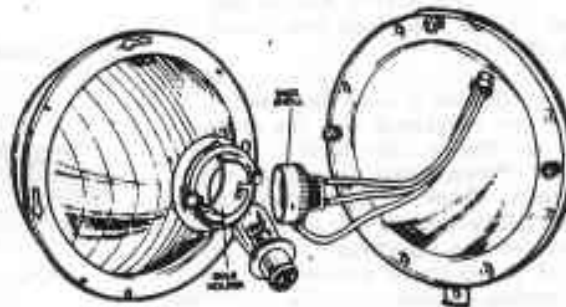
HEADLAMPS, MK.II, CHANGING BULB.
